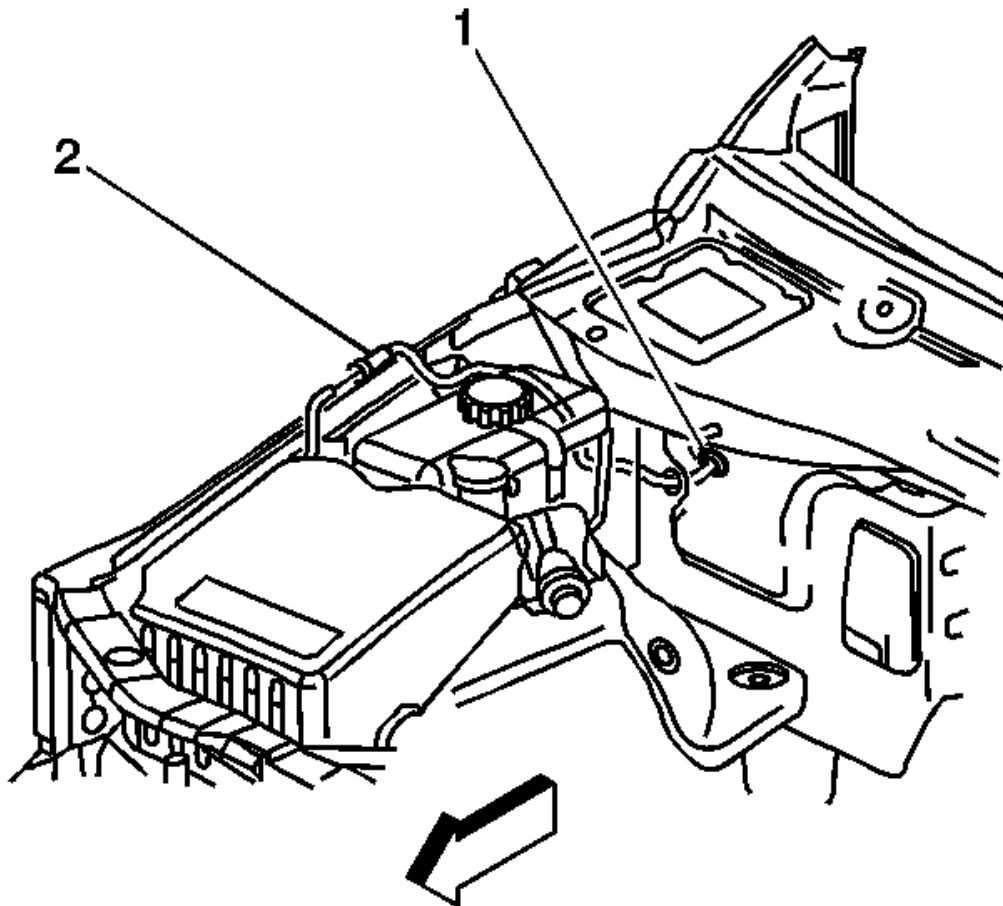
Locating Rear Washer Hose Connection, Near Coolant Tank (TrailBlazer, Envoy)
